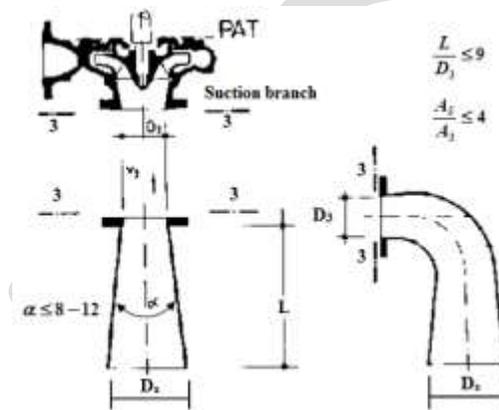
Typical draft tube design and main dimensions (according to Lein) [6].
